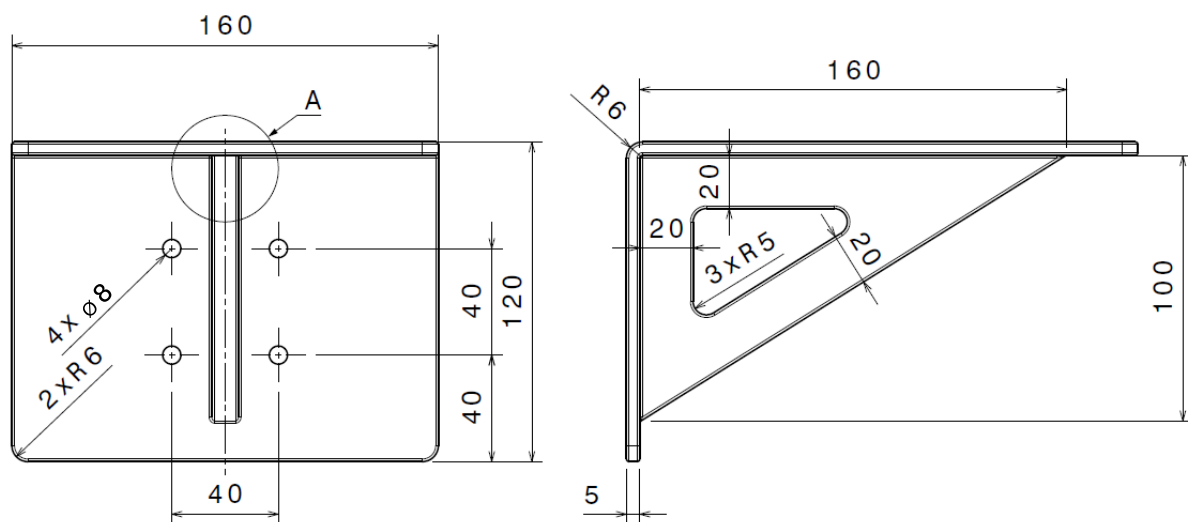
Extract from a technical drawing showing the retaining plate for the inlet's rack
